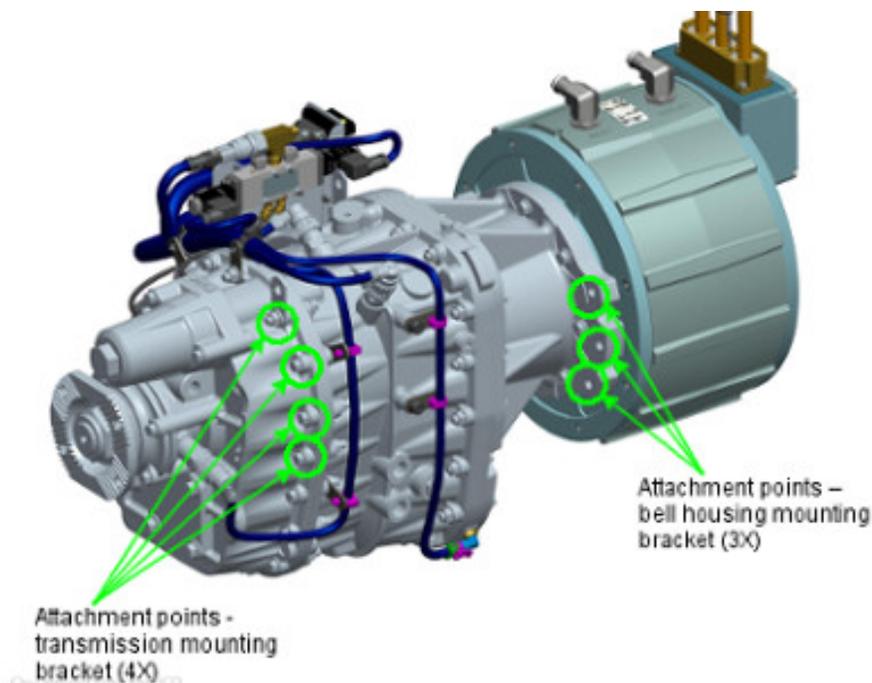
Left Side – attachment points for bell housing & transmission mounting brackets.
